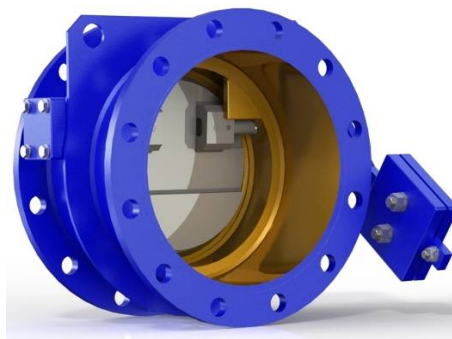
3D assembly model of the swing check valve with lever and weight – direct closing
